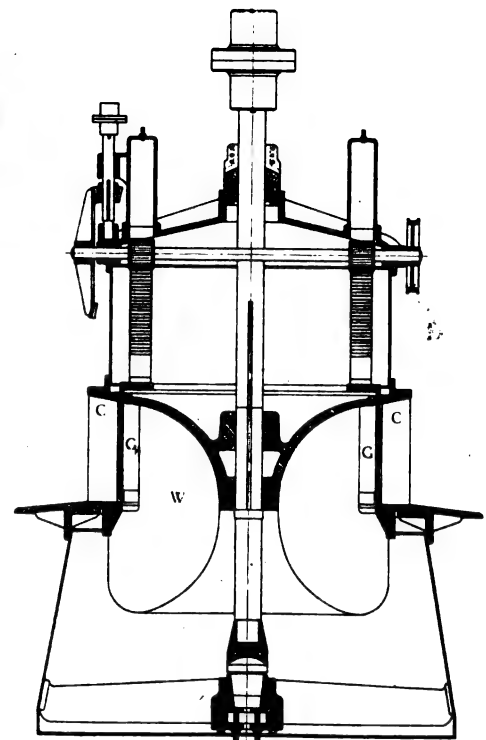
SECTIONAL VIEW OF VICTOR TURBINE.
